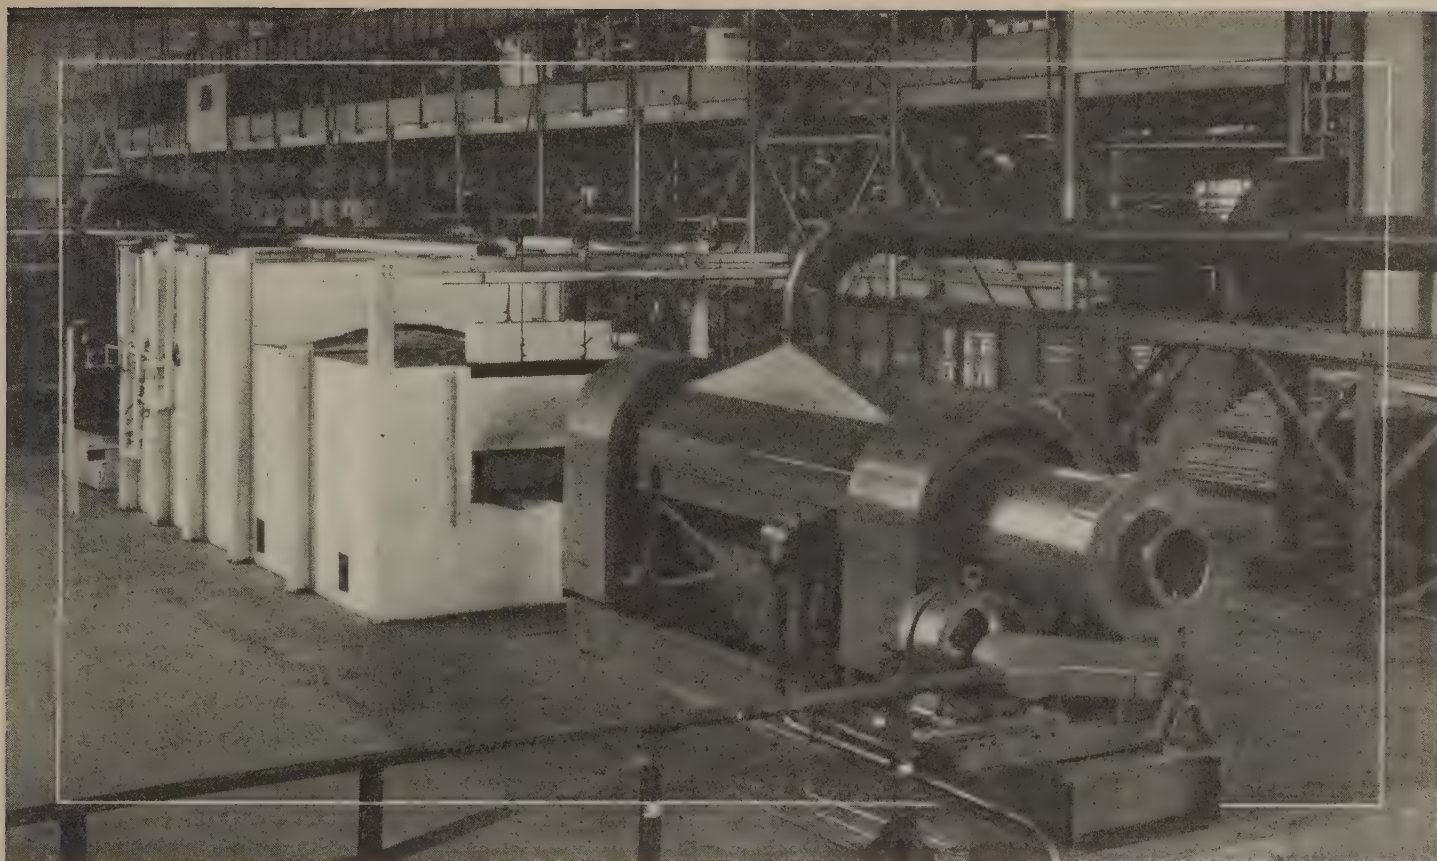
Normalizing Furnace and Tumbling Barrel for Handling Welded Blanks for Differential Ring Gears
